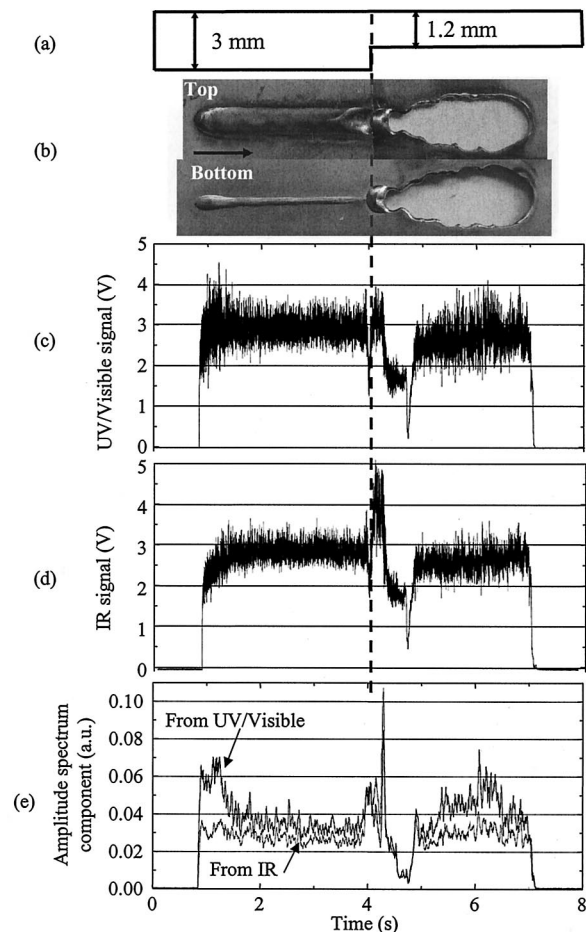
(a) Longitudinal cross section of the Inconel stepped workpiece; (b) Photographs of top and bottom surface when bead-on-plate Inconel was welded at constant laser power and at a speed of 0.6 m/min; (c) UV/visible and (d) IR signals recorded by the detection box; (e) Amplitude of the spectral component in the frequency range between 1600 and 2400 Hz calculated in real time from the UV/visible and IR signals.
